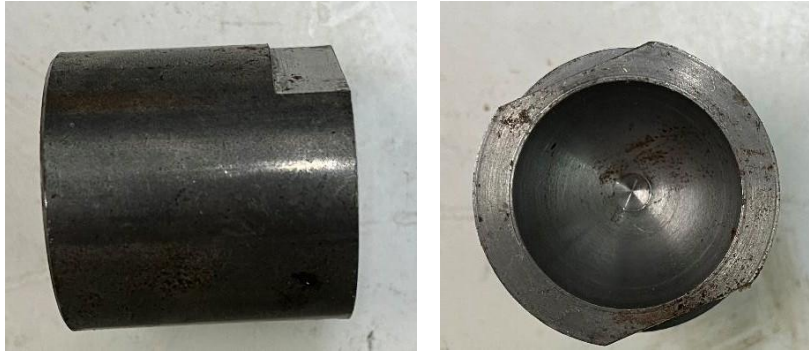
Two photos of the manufactured connection from the above drawings
